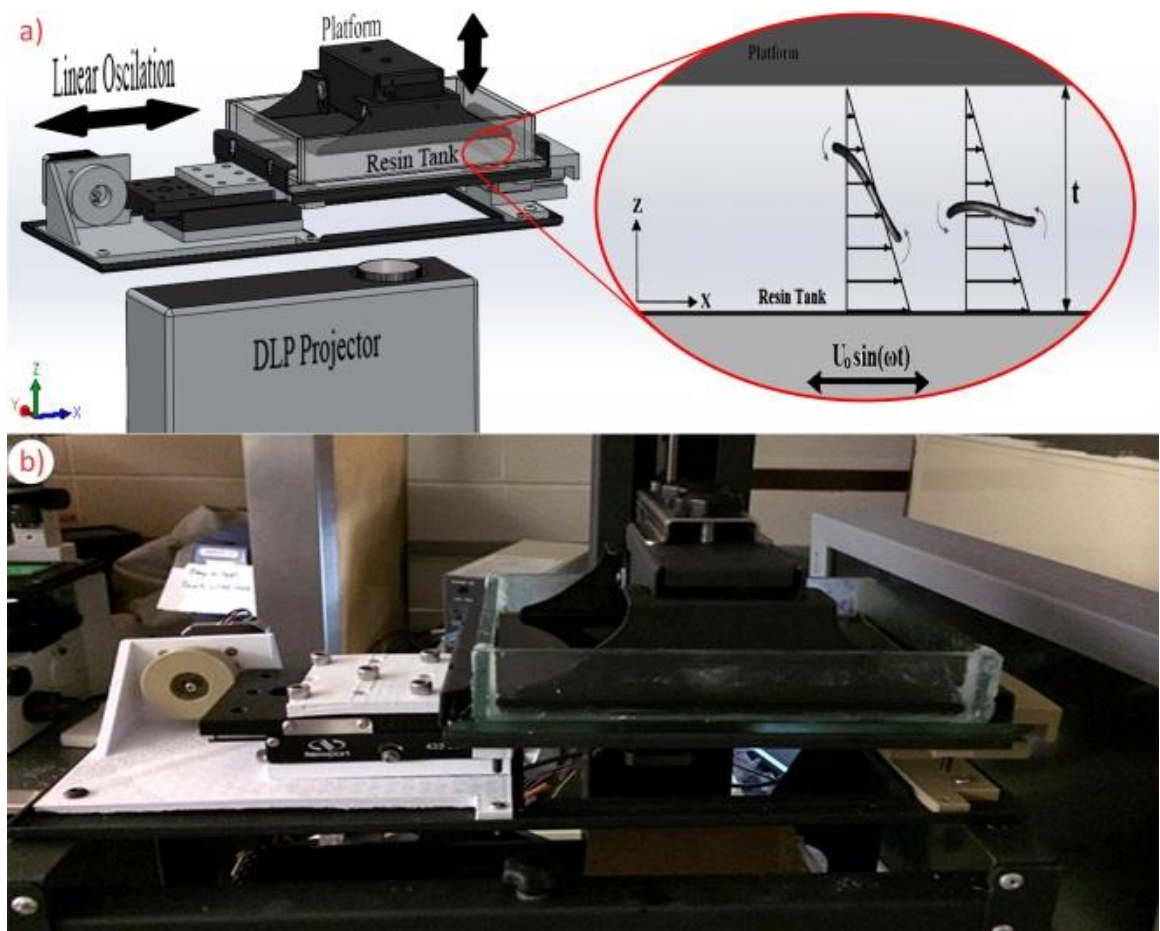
DLP based SLA desktop 3D printer and incorporated linear harmonic oscillator mechanism. (a) 3D demonstration of the system consists of linear oscillation mechanism, platform, resin tank, and DLP projector. (b) Photo of 3D printer during linear oscillation process
